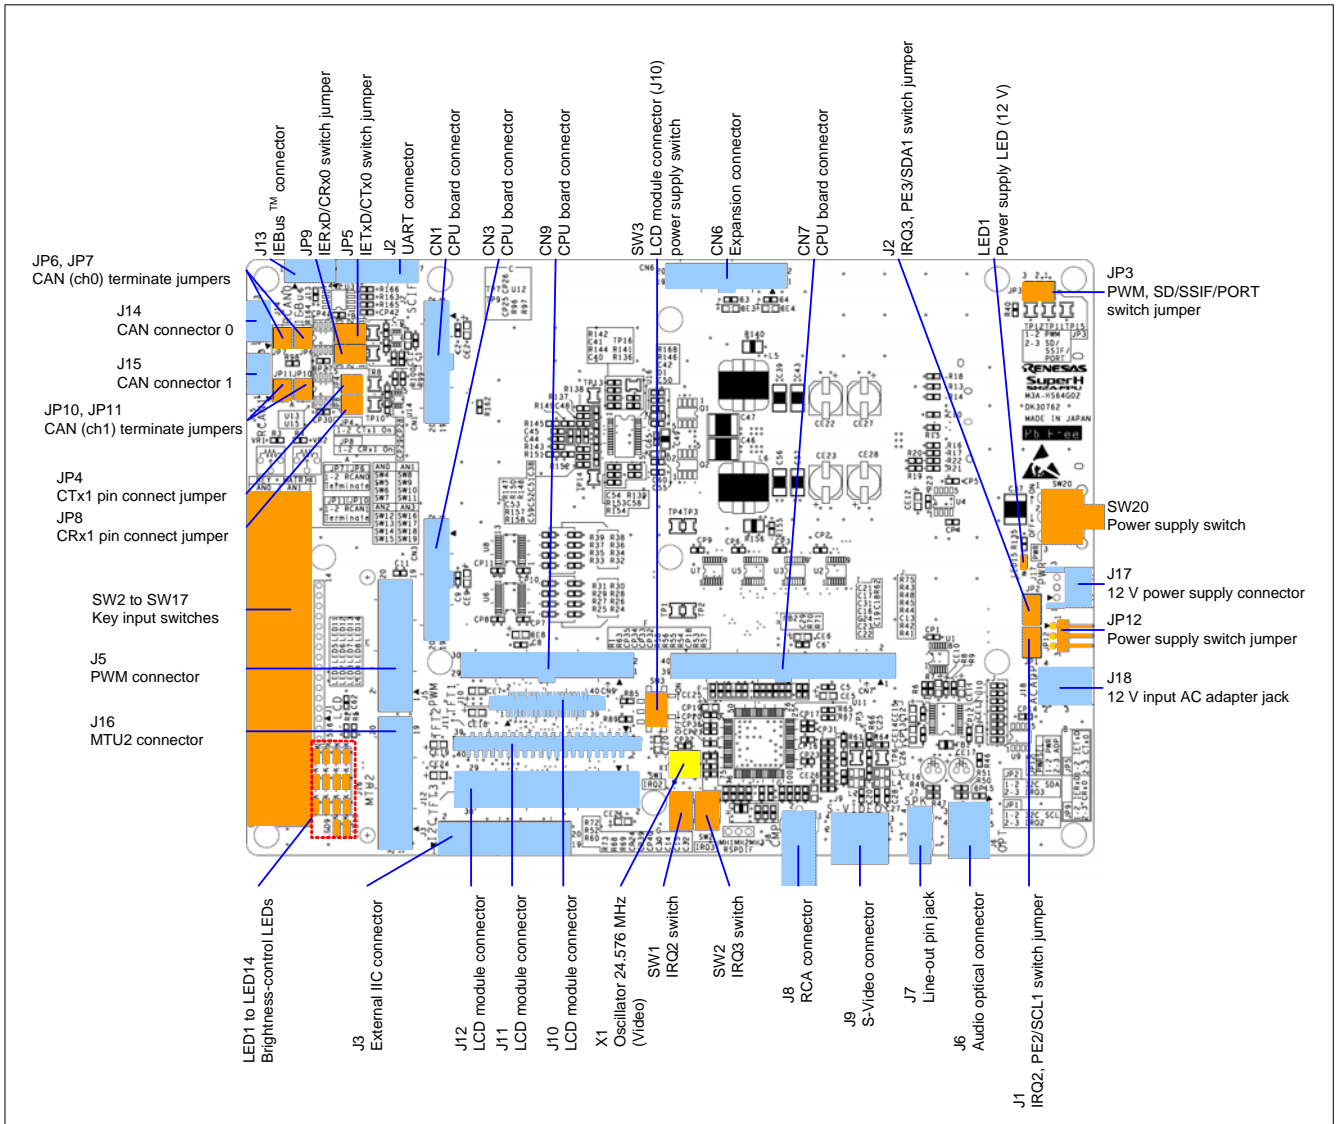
M3A-HS64G02 Layout and Component Placement (Top View of the Component Side)
